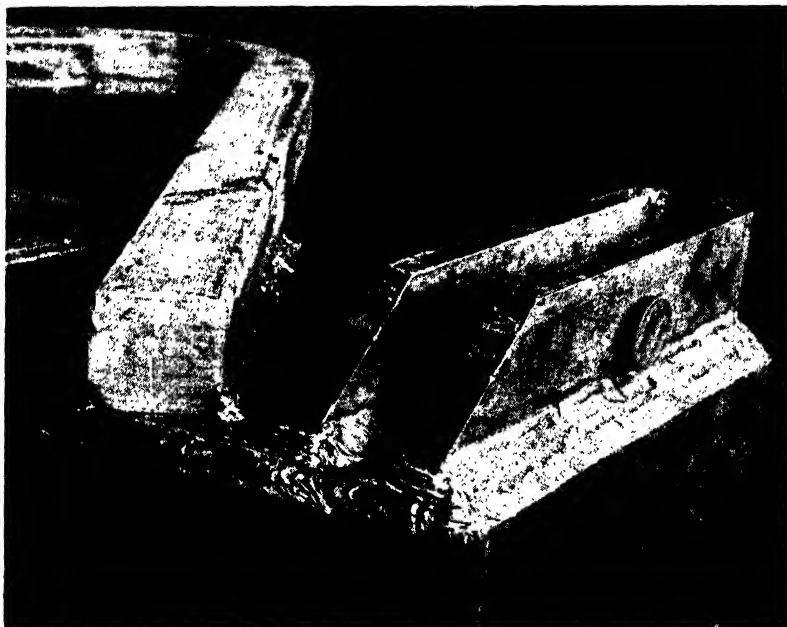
The ability to control the contour and deposition of welds on a structure such as this requires a fundamental period of training on the part of the welding operator. Note the size, the careful tie-ins, and the multipass construction of these welds. (*Courtesy of R. G. LeTourneau, Inc.*)
